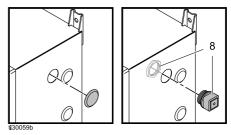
Speed Controller Plug, Cable Fitting, and Nut
